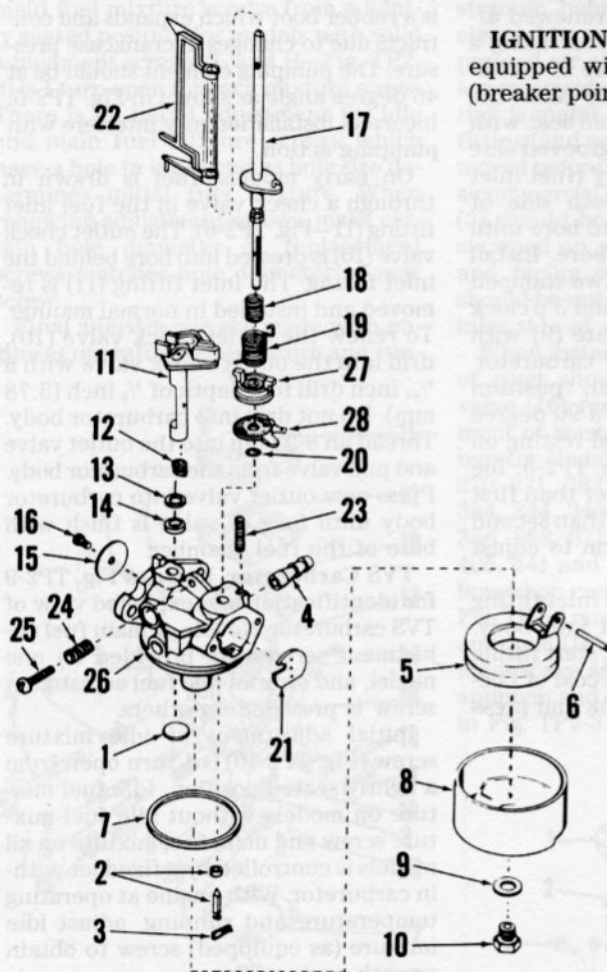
Exploded view of typical TVS type carburetor.
